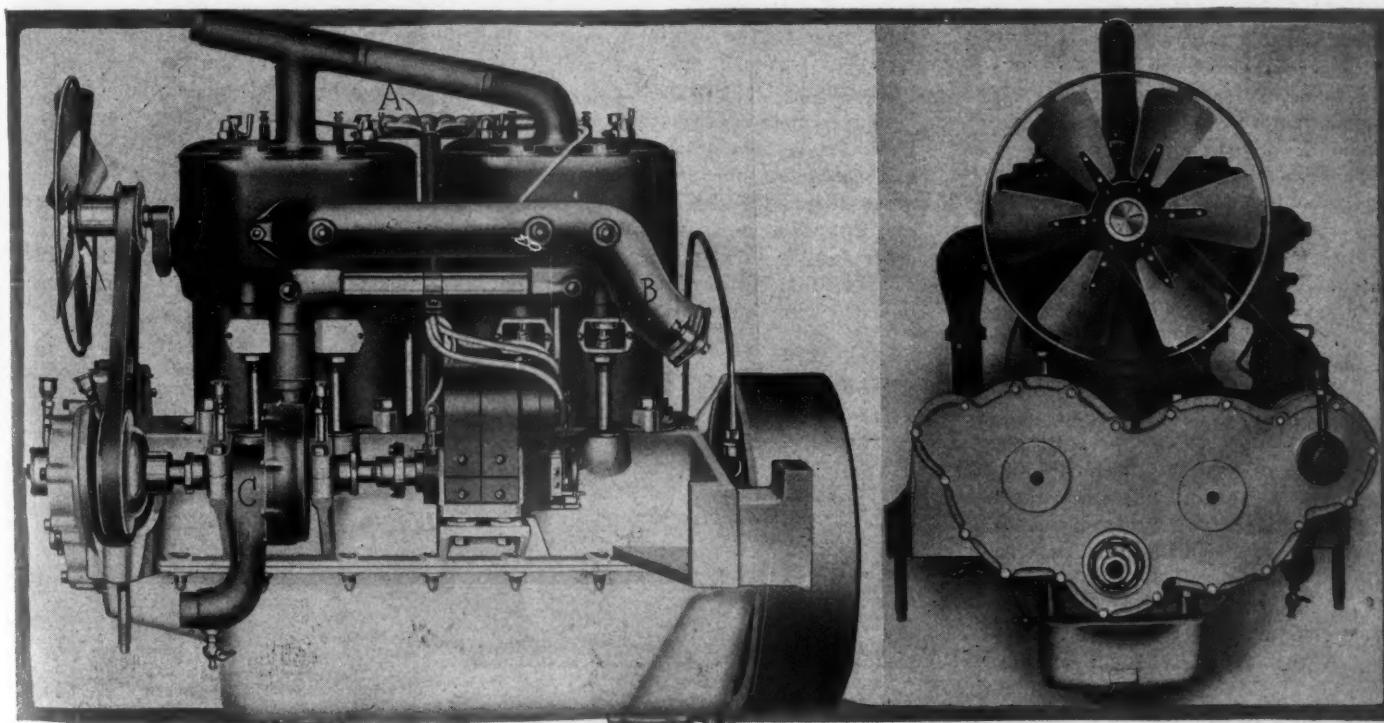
LEFT SIDE OF MOTOR SHOWING WATER PUMP C AND METHOD OF SUPPORT OF HIGH-TENSION WIRES AT A FIG. 5—THE FRONT OF THE HAYNES FOUR-CYLINDER MOTOR FOR 1912
